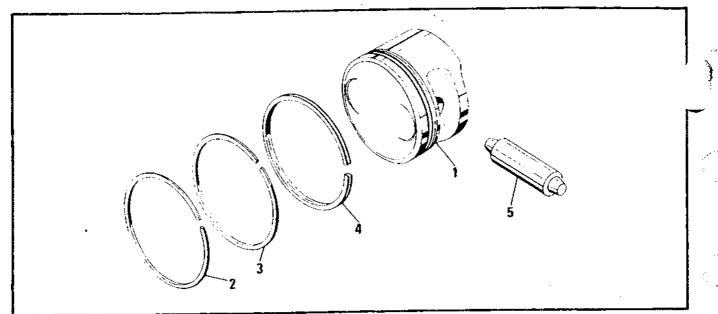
PISTON AND RING ASSEMBLY MODELS 0-470-A,B,E,G,J,M,P
